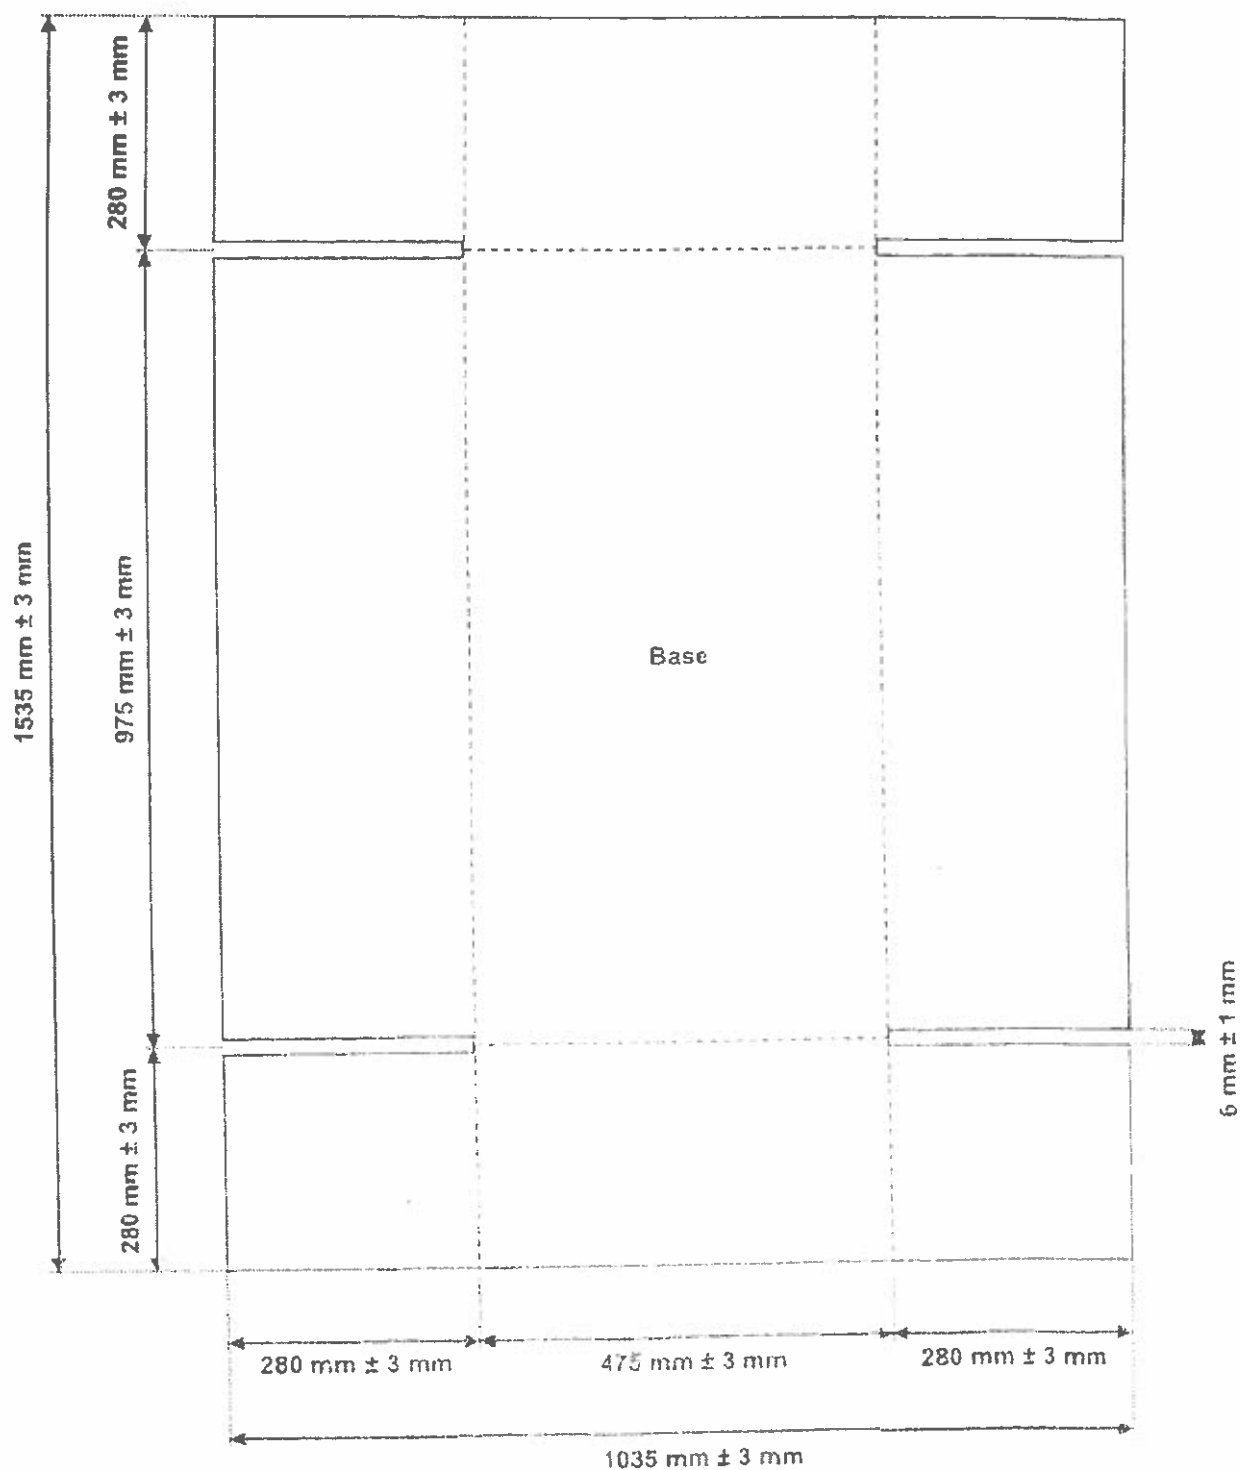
Dimensions of the base component of the telescopic board box (flat measurements)
